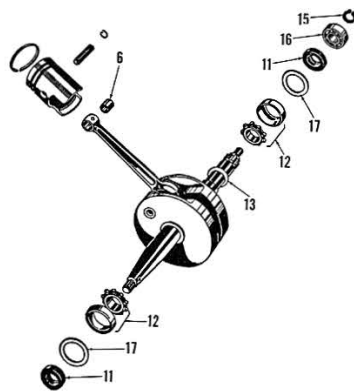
Crankshaft, bearings and piston typical of all models. Crankshaft and connecting rod are available only as a complete unit.
